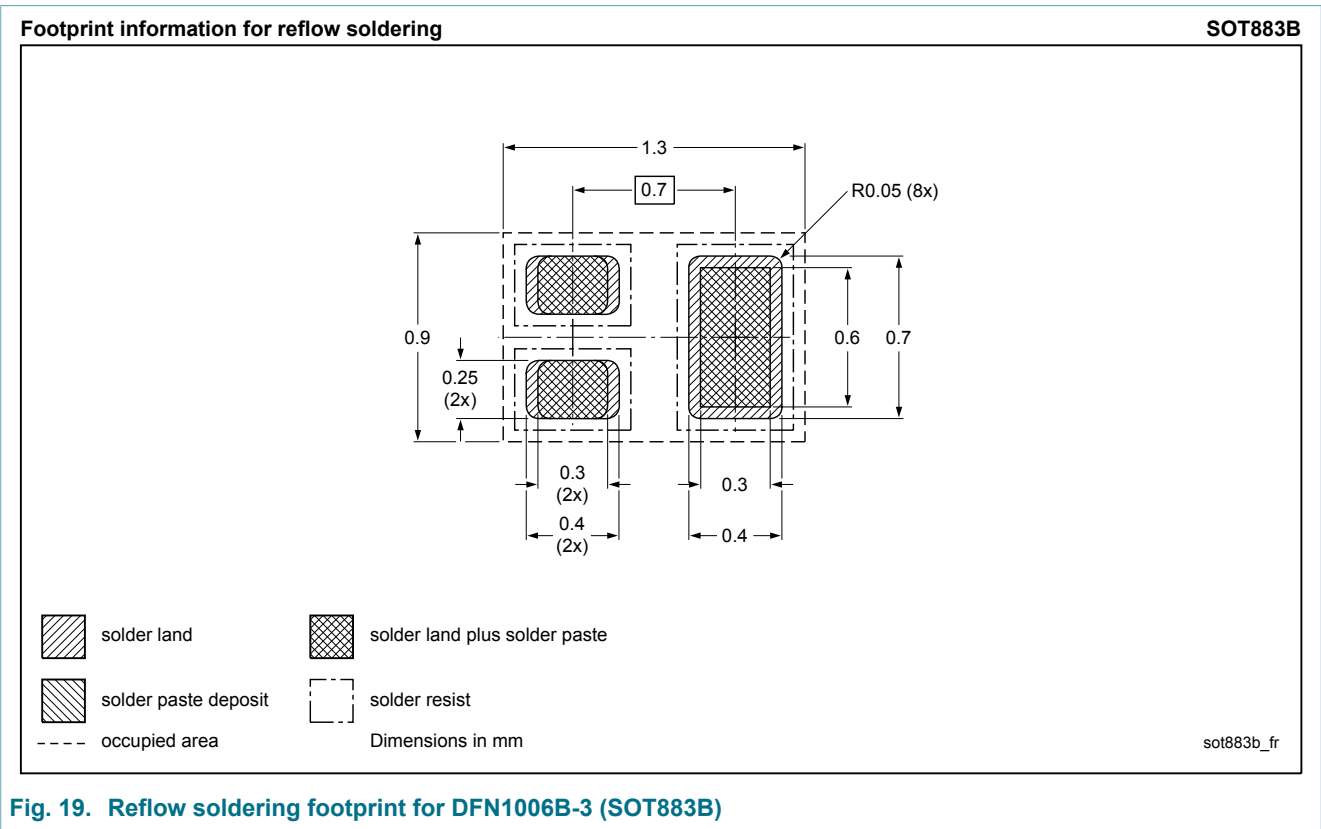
Reflow soldering footprint for DFN1006B-3 (SOT883B)
